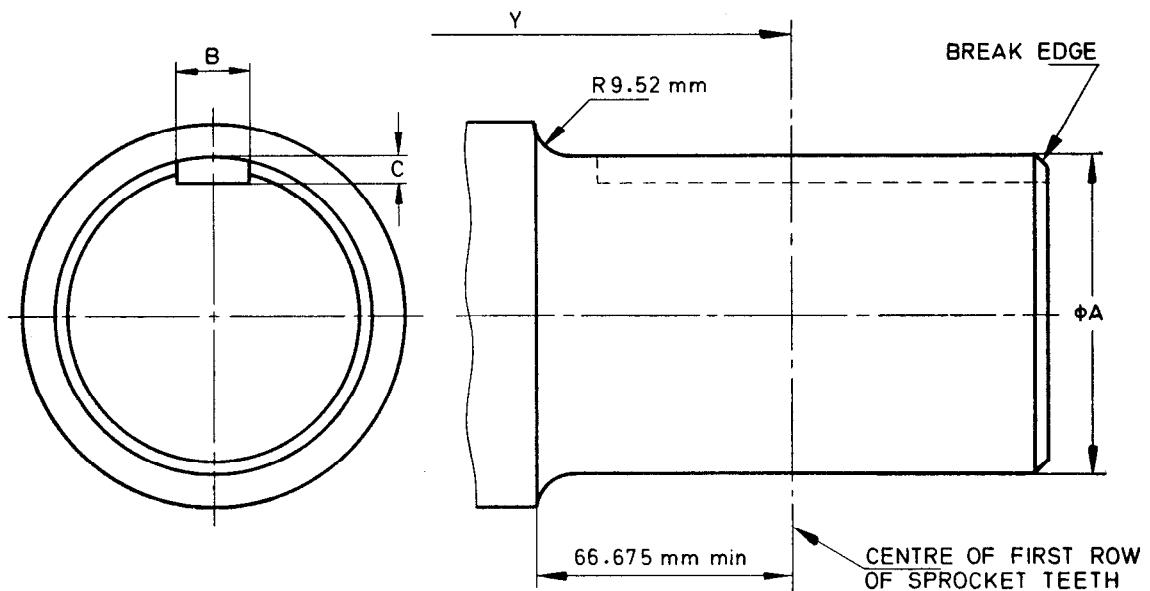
ROTARY TABLE PINION-SHAFT EXTENSIONS
